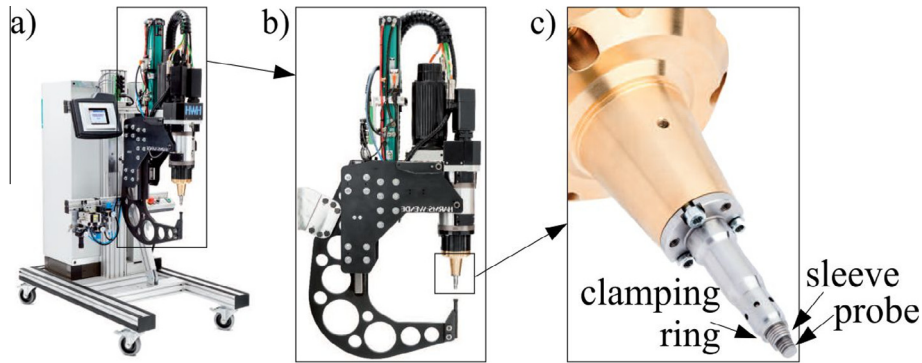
RFSSW machine made by Harms & Wende company [20]: a) machine, b) operating arm, c) tool.
